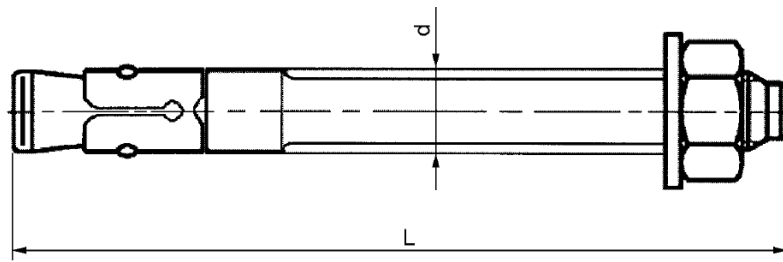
TT-THROUGH BOLT steel expansion fasteners dimensions, versions TT, TT-G and TT-SS
